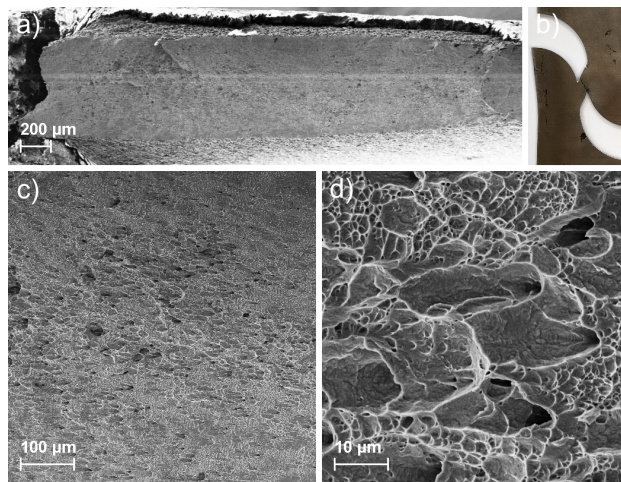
Micrographs of the fracture surface of the 3SHEAR specimens. The top-left figure (a) corresponds to the overall view of the fracture surface and the top-right figure (b) shows the whole fractured specimen. The bottom-left figure (c) and bottom-right figure (d) correspond to higher magnifications of the fracture surface.
